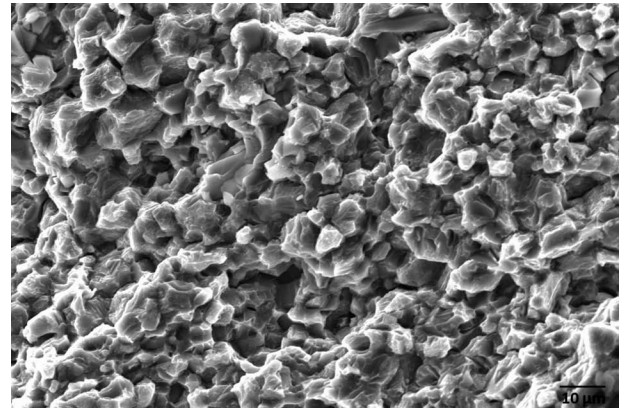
Another view of fracture surface shown in Fig. 156 indicating ductile feature
